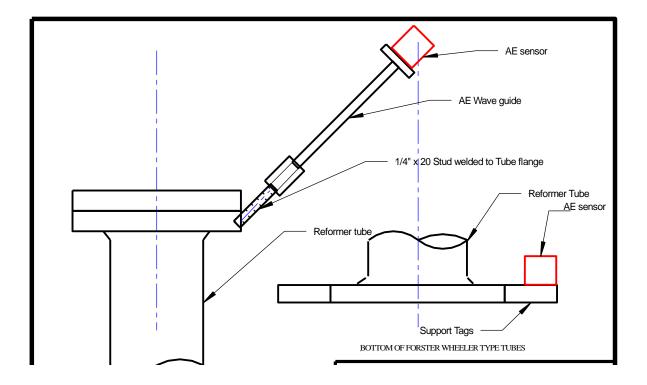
shows a drawing of the typical mounting on the Kellogg & the Forster Wheeler tube system.
